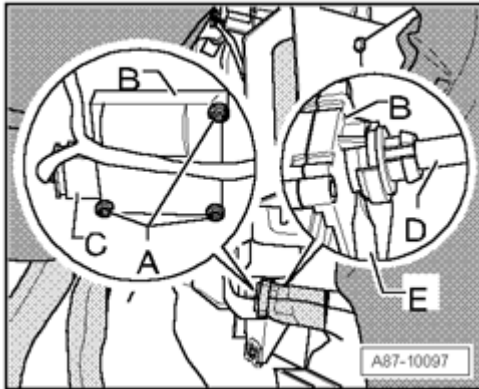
Identifying Connector, Bolts, Connecting Element, And Control Motor
